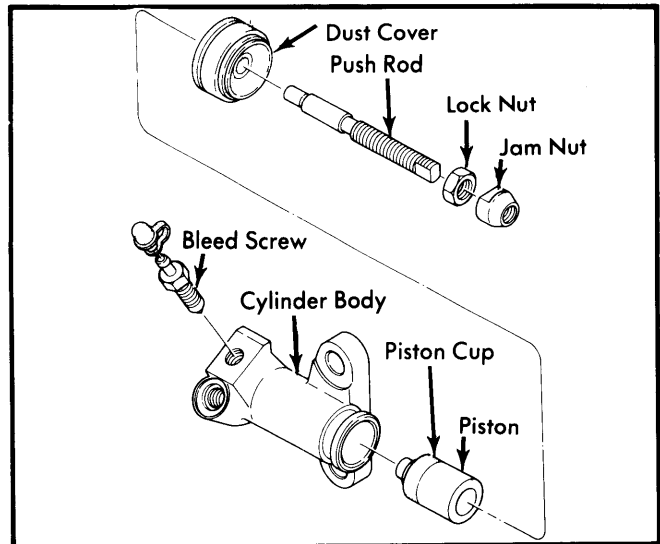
Exploded View of 210 Clutch Slave Cylinder
